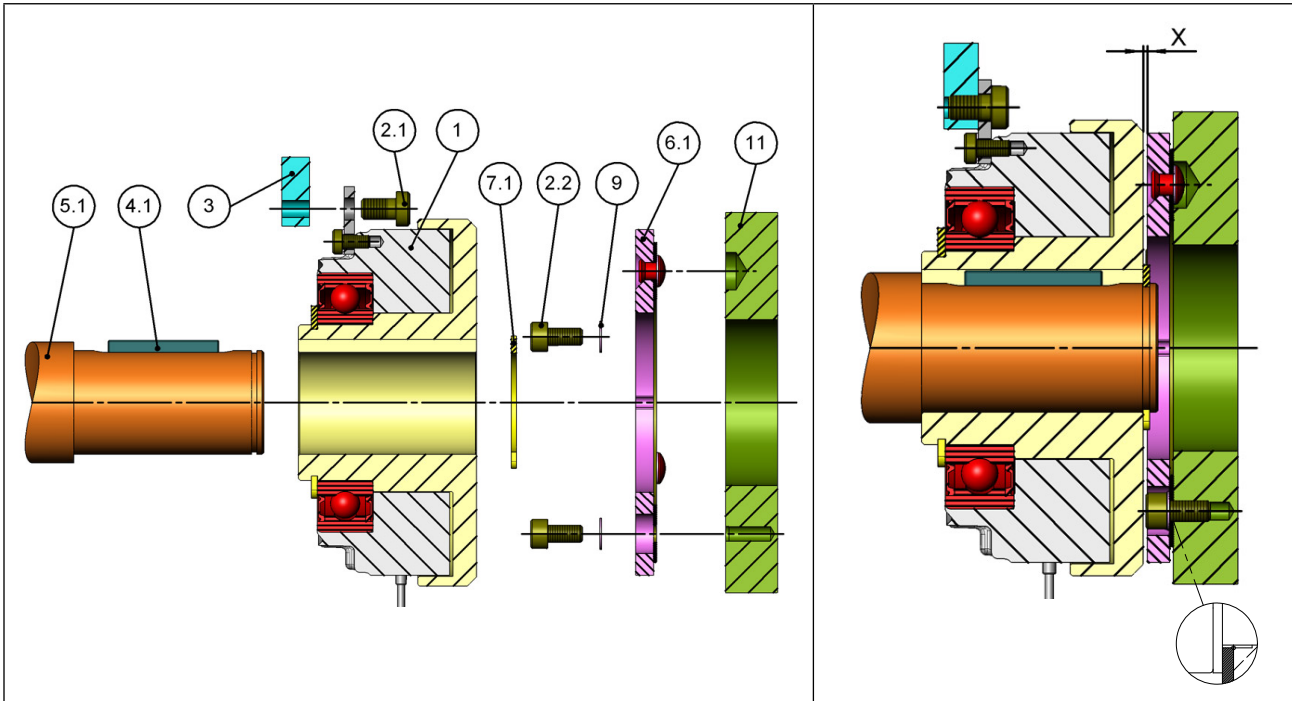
Shaft-mounted coupling with torque arm & armature element without hub (e.g. 08...12-03-710-xxxx)
